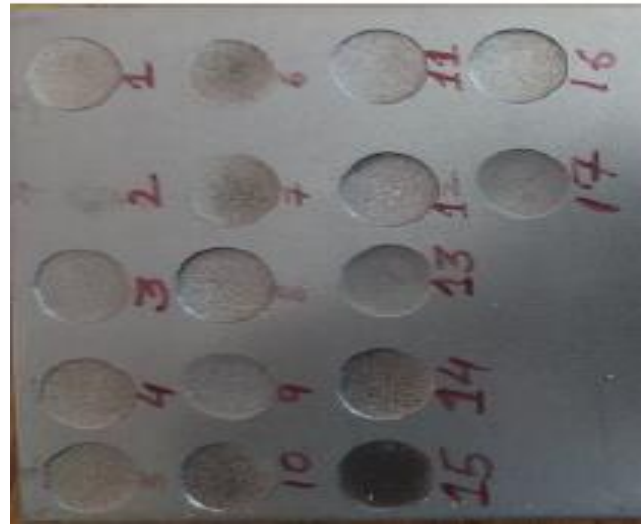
Machined workpiece image, providing visual confirmation of the optimized parameters
